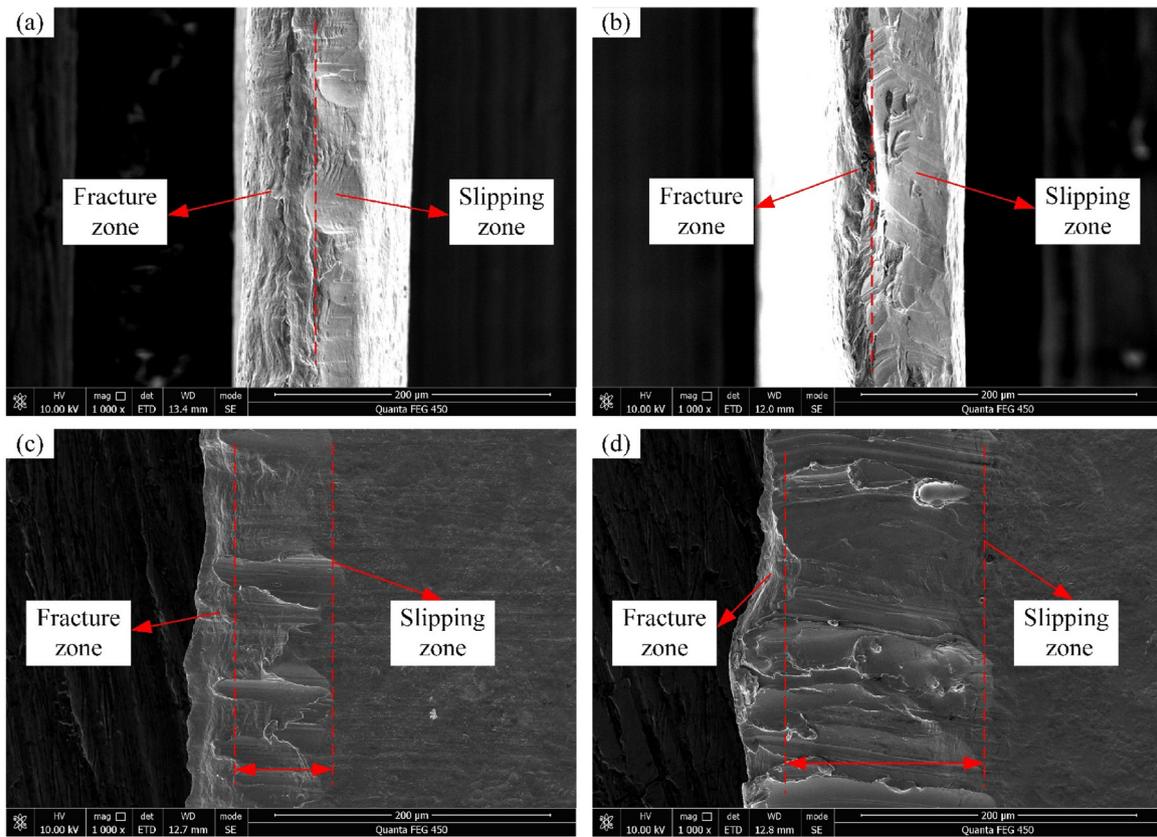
SEM of fracture topography: (a) Vertical view of fracture in rigid die forming; (b) Vertical view of fracture in flexible die forming; (c) Lateral view of fracture in rigid die forming; (d) Lateral view of fracture in flexible die forming.
